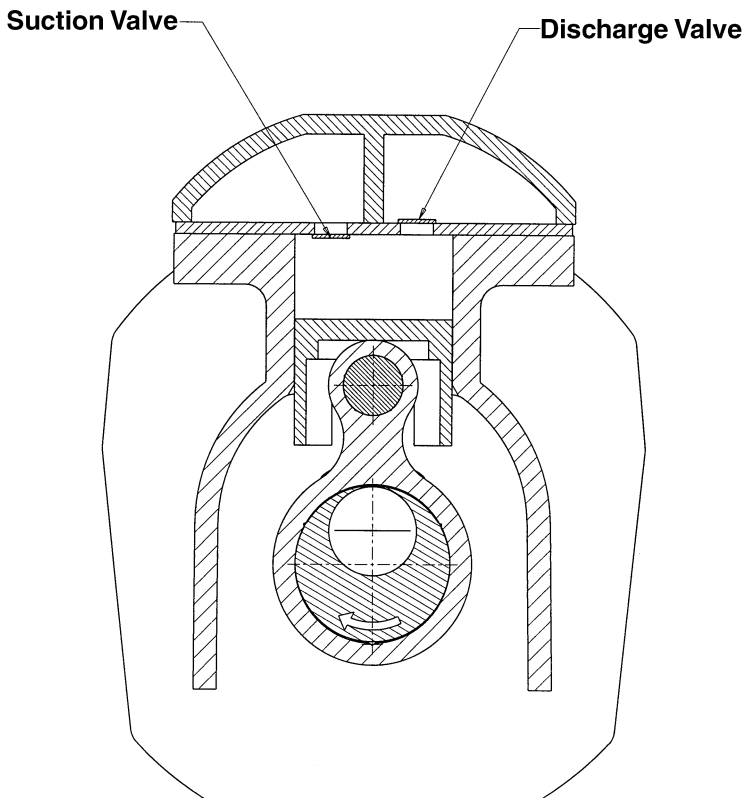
Cross-sectional drawing of a typical reciprocating compressor. (Courtesy of the Copeland Corporation, Sydney, OH.)
